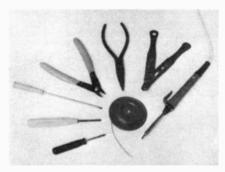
The basic tool kit with, clockwise left to right, small cross-head screwdriver, spot-face cutter, small plain screwdriver, wirecutters, long-nosed pliers, wire strippers, mains soldering iron and in the centre, a reel of solder.
